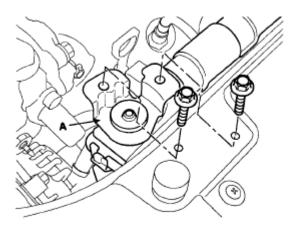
Identifying Cooling Fan Mounting Bolt (2 Of 2) Courtesy of HYUNDAI MOTOR CO.
